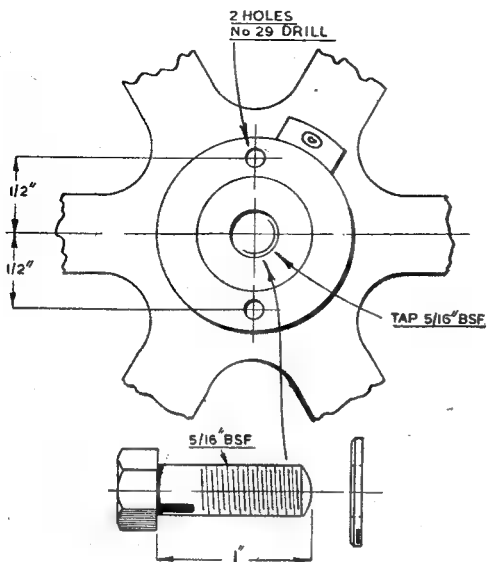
Showing the end face of the pulley and countershaft with the handle fixing-screw
